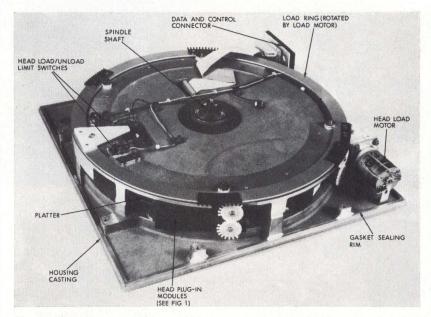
Fixed-head cartridge with cover removed, showing head-loading mechanism, spindle, Winchester-type media (single platter) and noncontact R/W heads. Mechanism to control head-pad actuation is operated by load motor
